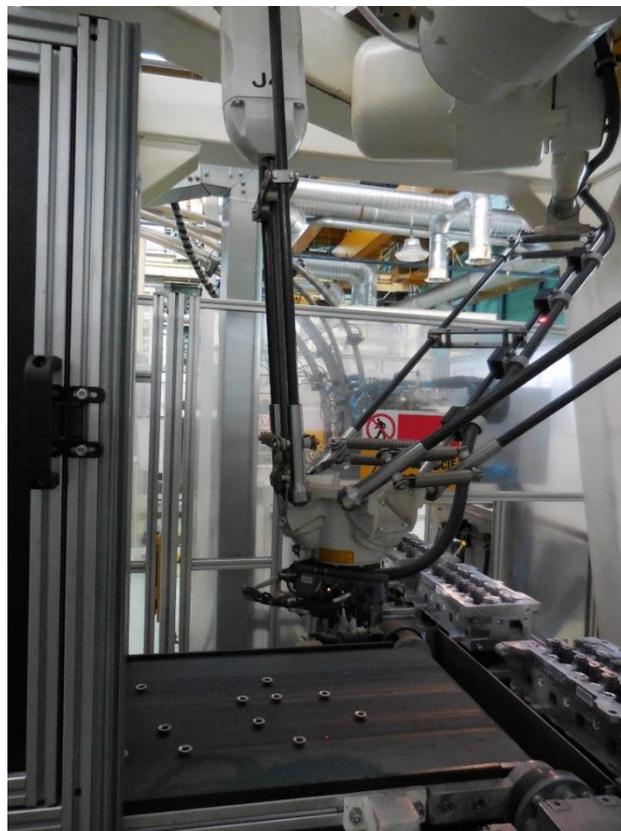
Upper valve retainers' assembly: the FANUC Robot M-3iA/6S about to pick items from the conveyor and place them on the lower cylinder head
